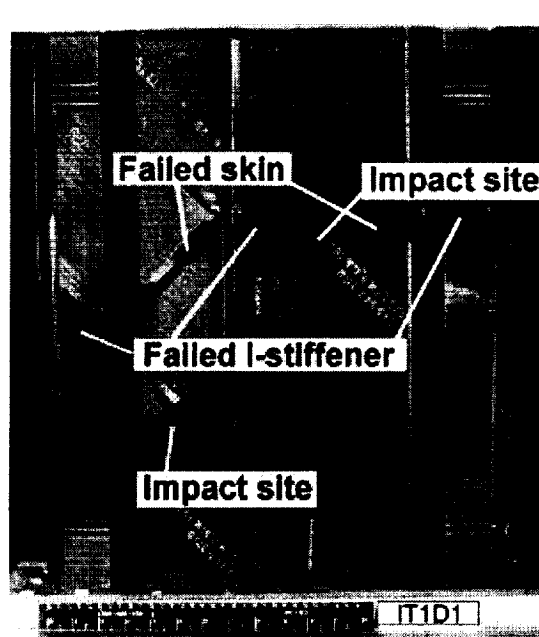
Failure location on stiffener side of Specimen IT1D1.
